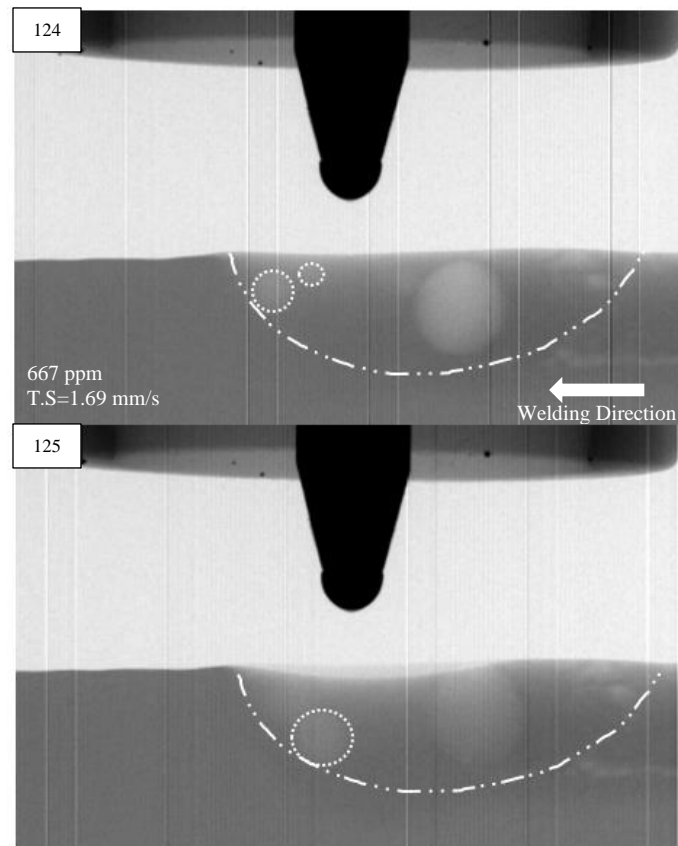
Alloy 6061 welded sample using 667 ppm shielding gas hydrogen at a travel speed of 1.69 mm/s, shows the coalescence of two pores in the weld pool.
